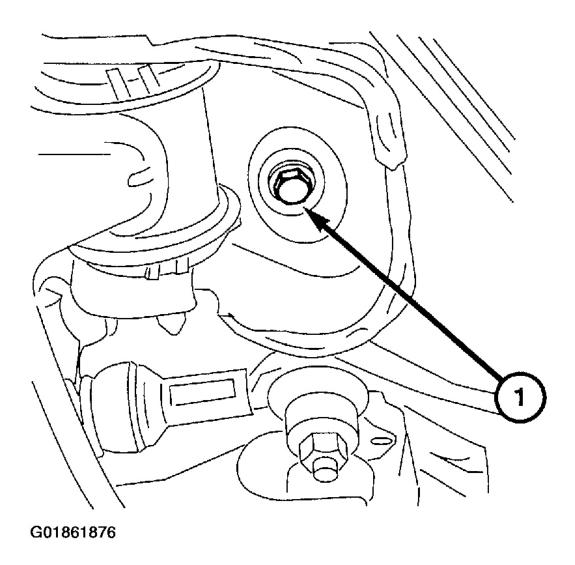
Installing Front Engine Mount Bolt Courtesy of DAIMLERCHRYSLER CORP.
